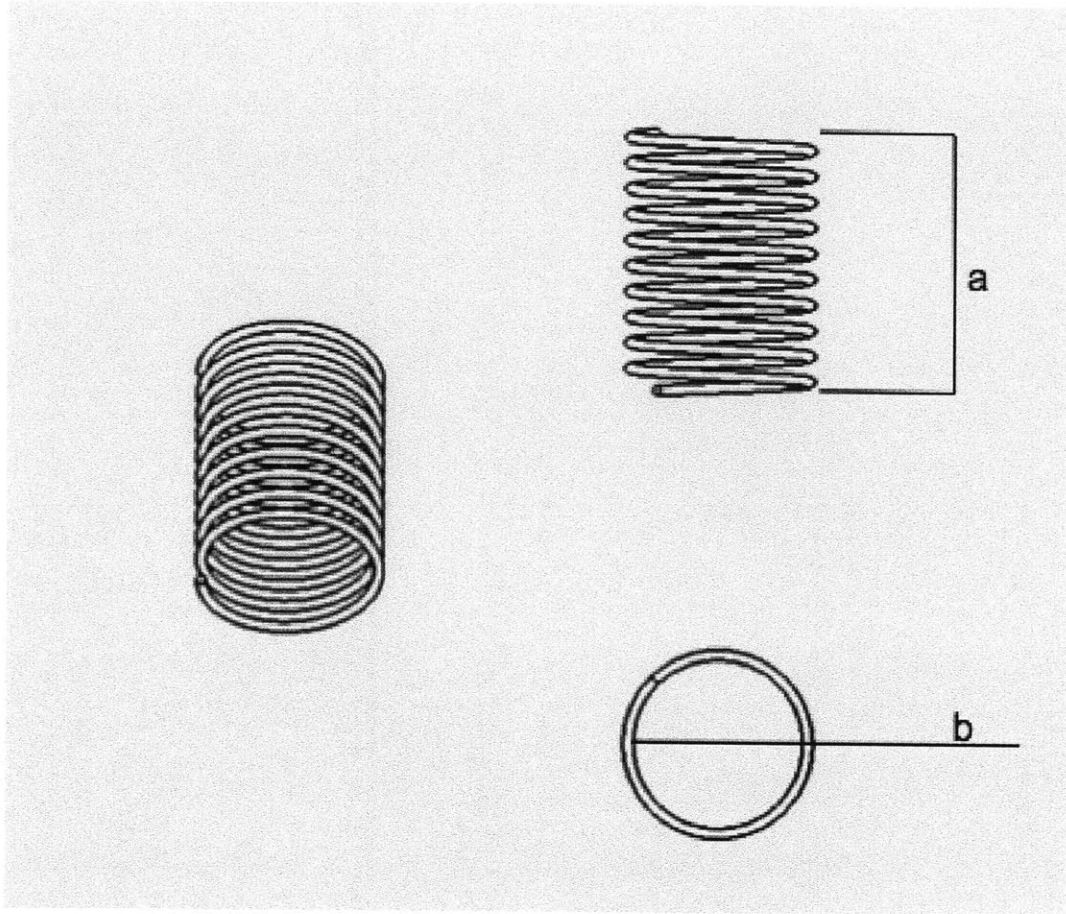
Spring. Dimensions: (a) spring length. (b) spring diameter. In the case of the spring the length and spring constant will depend on the testing situation. A stronger spring may be required for heavy duty battery testing.
